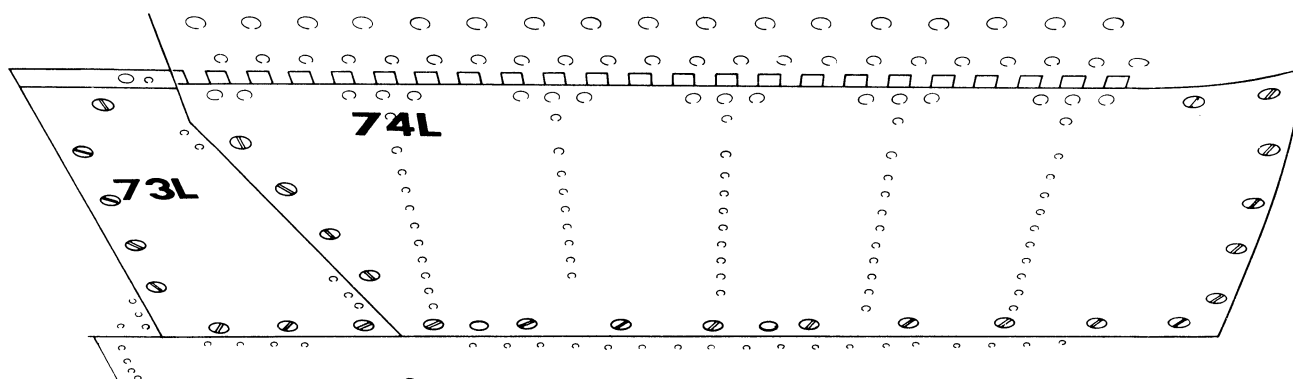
Engine Access Door Closing (Sheet 1 of 5)
